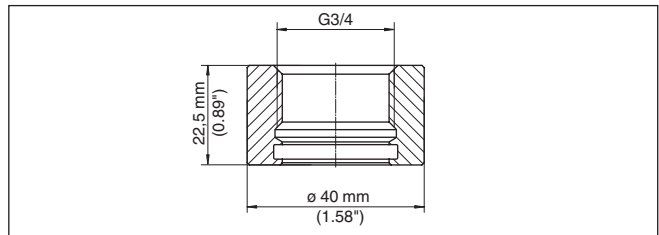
Dimensions of welded socket, G $\frac{3}{4}$  (DIN 3852-X) - VEGABAR 82
